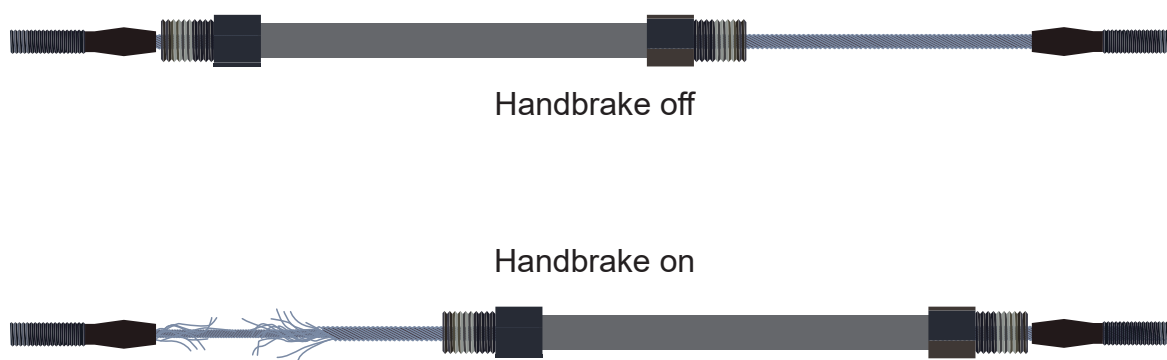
Diagram showing how the part of the cable which was damaged was within the housing during the inspection.
